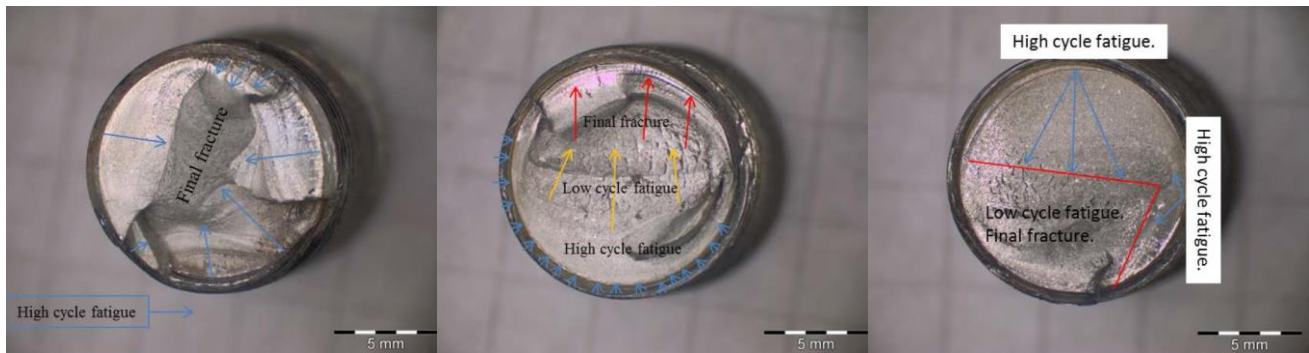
Fracture surfaces on bolt pieces. Photo: FLO materials lab
